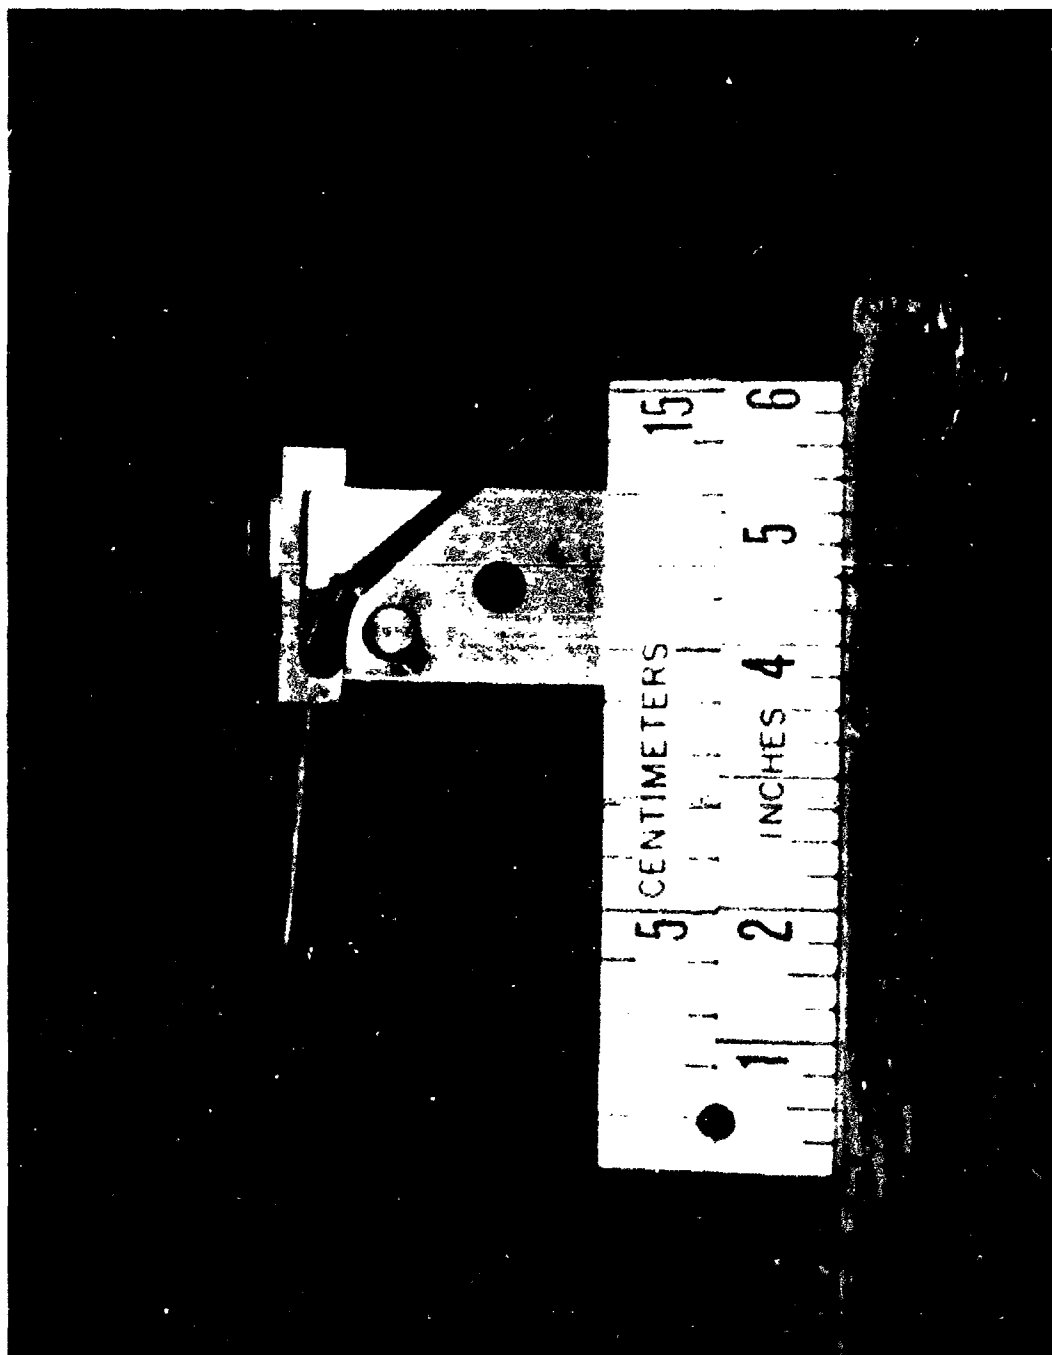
Electrode Cooling Tube 45 Degree Bending Fixture.
